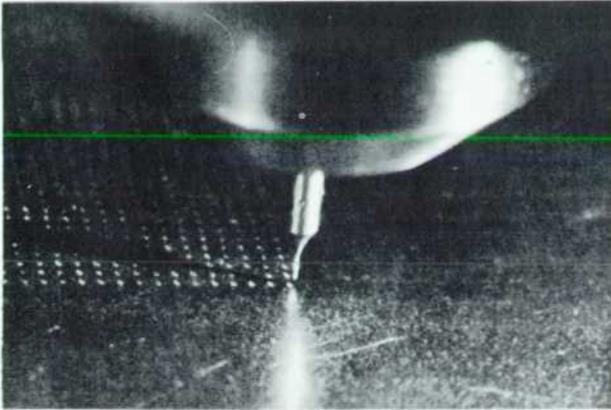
In-house developed ultraprecision air-bearing spindle has been used with numerical-control machine
